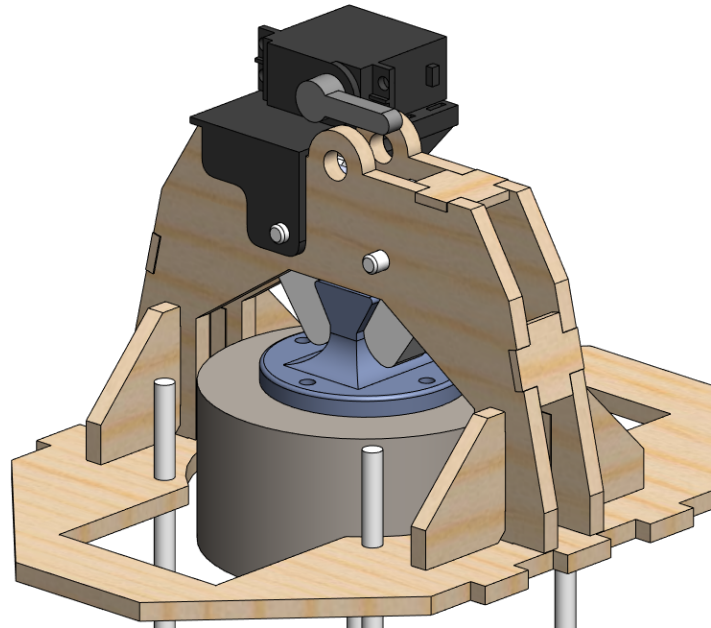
Full view of the trigger mechanism (servo cable not shown)
